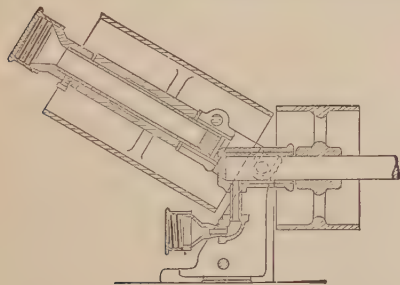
3-pulley Troughing Idler with Center Pulley Tight on Shaft and Corner of Inclined Pulley Depressed. (Weller Mfg. Co.)
